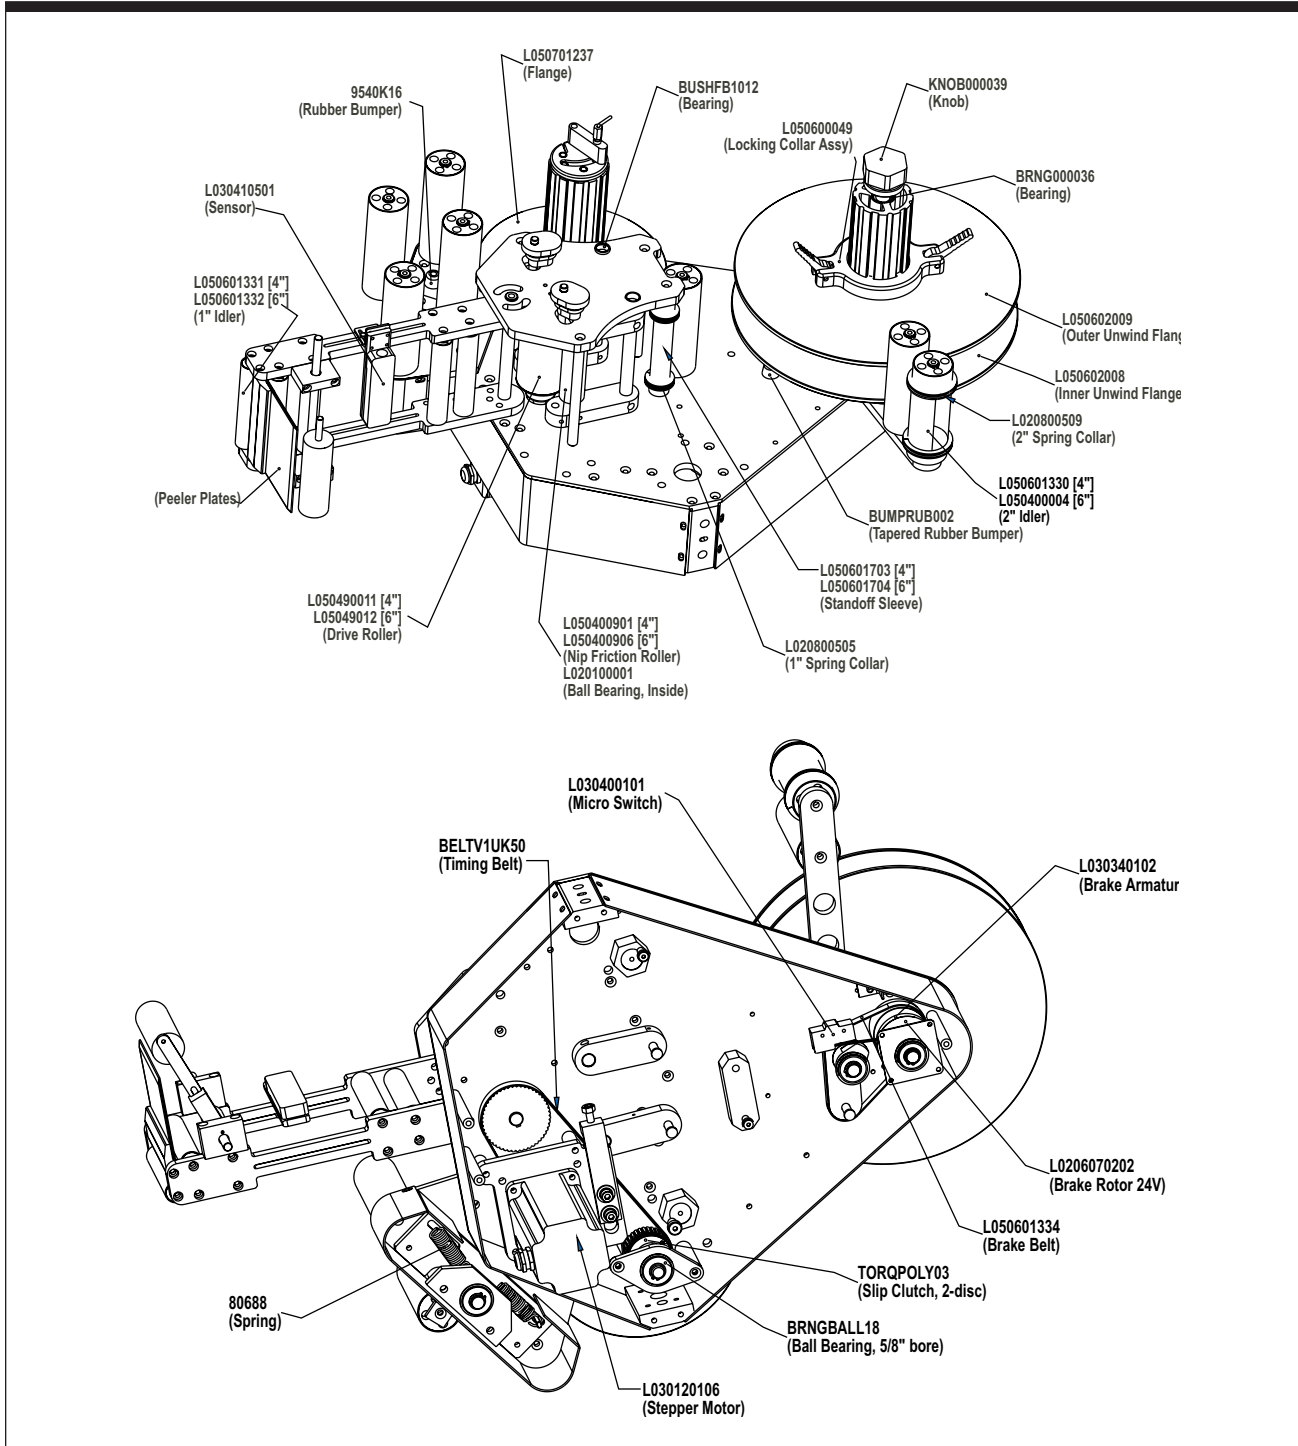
L500A V2 Labeler - Front and Side Views - Callouts
